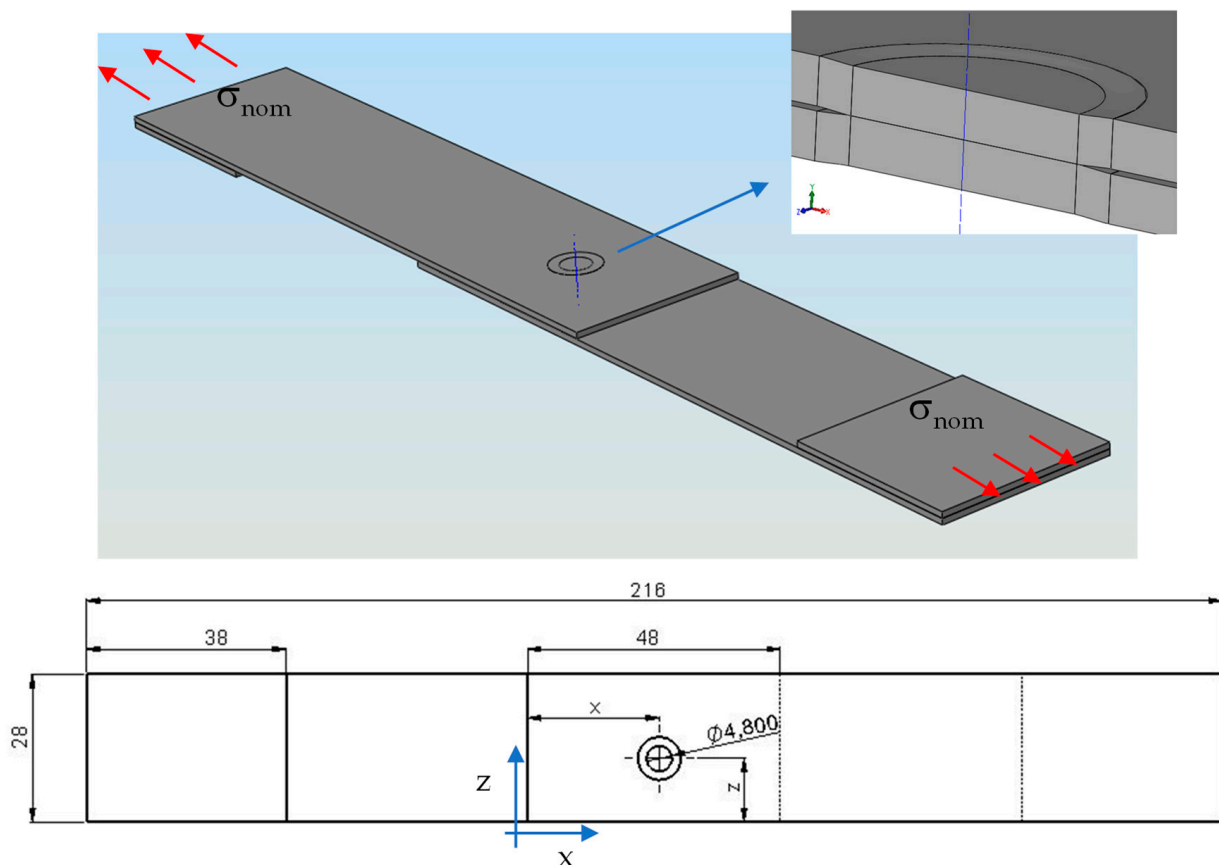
Three-dimensional spot weld model and specimen size (d : spot weld diameter = 4.8 mm; t : plate thickness = 1 mm; σ_{nom} : tensile nominal stress).
